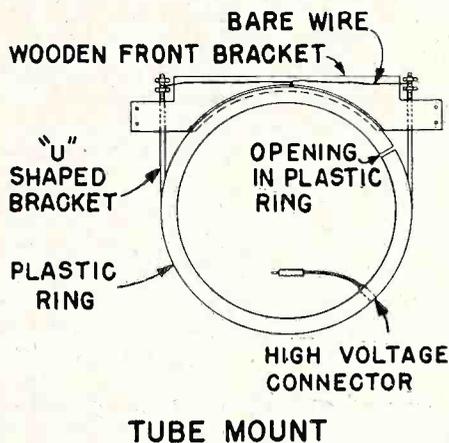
Front mounting of kinescope, Sears 110.499 Series.
